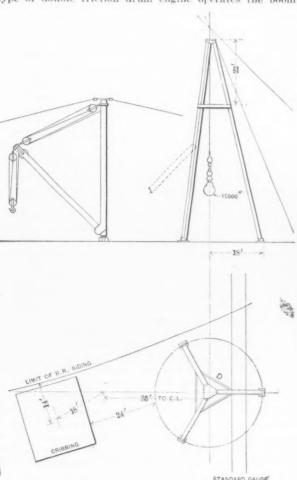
Elevation and Plan of a Carlin Casting Breaking
